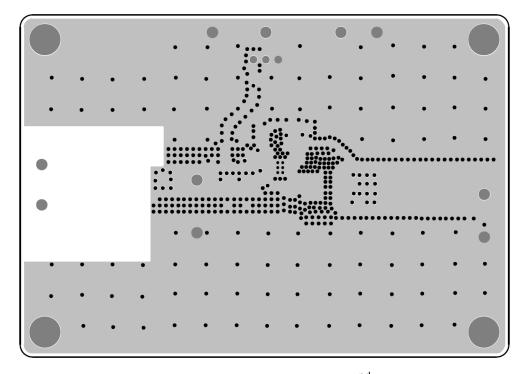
PCB Layout—Inner Side (2<sup>nd</sup> Layer)
